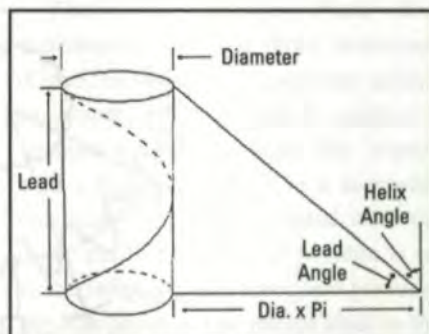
Tooth alignment (formerly "Lead"). Courtesy of AGMA.
